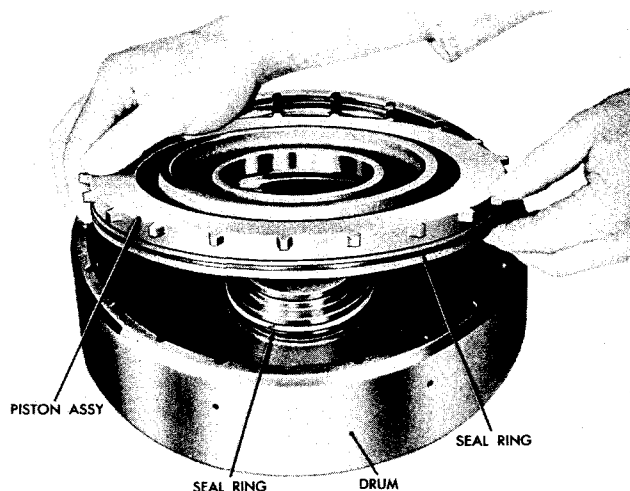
Removing or installing intermediate-range clutch piston assembly
